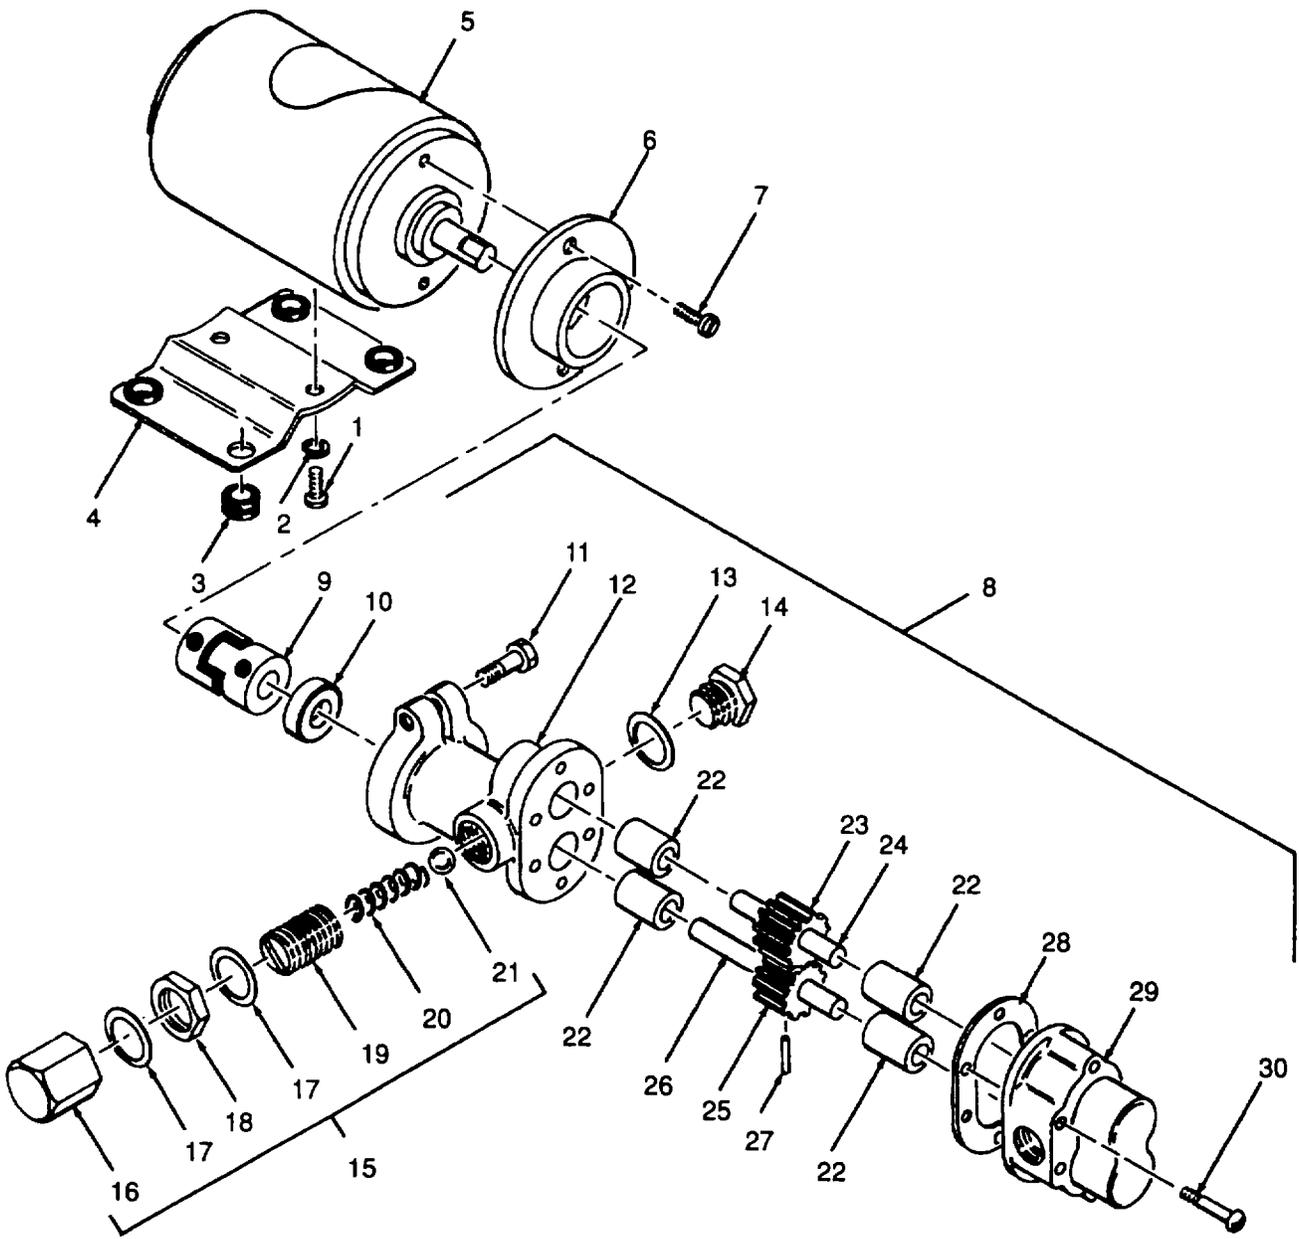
Pre-lube Pump Assembly, Exploded View (Sheet 1 of 2)
